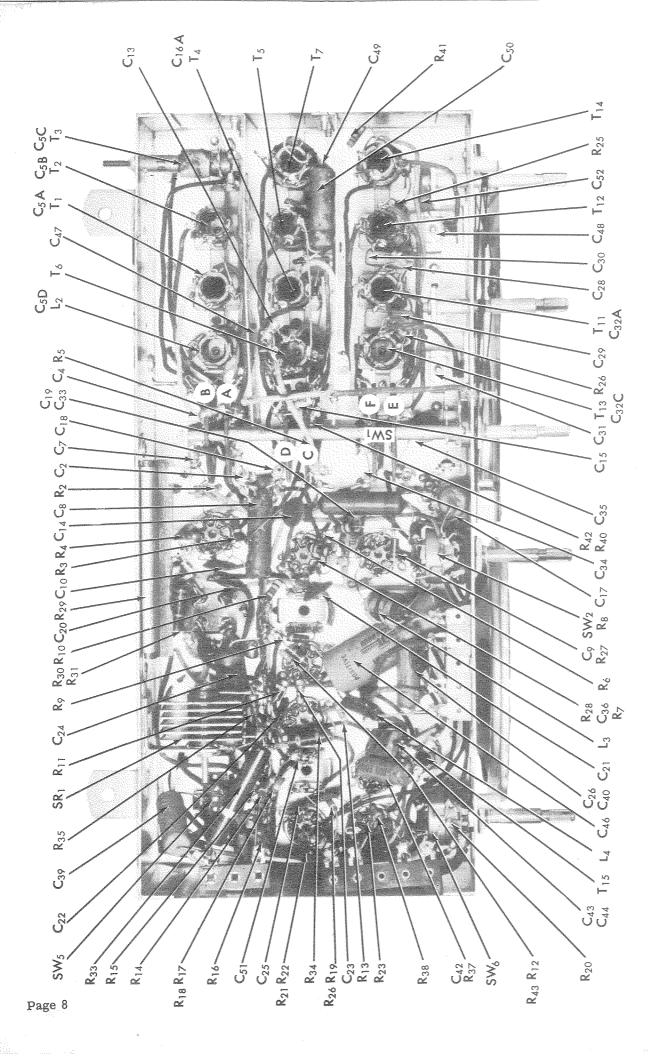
BOTTOM VIEW - ALIGNMENT POINTS
